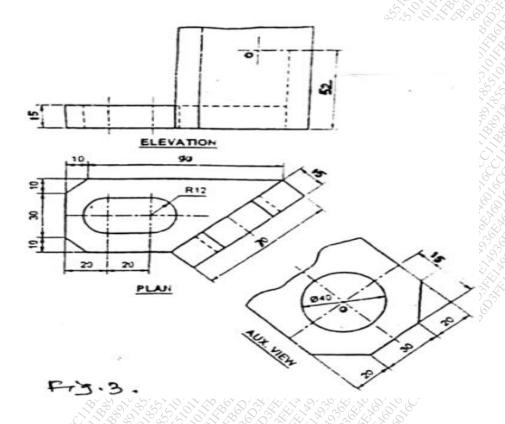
shows the top view, incomplete front view and partial auxiliary view of bracket. Draw the top view and complete the front view showing all details.
